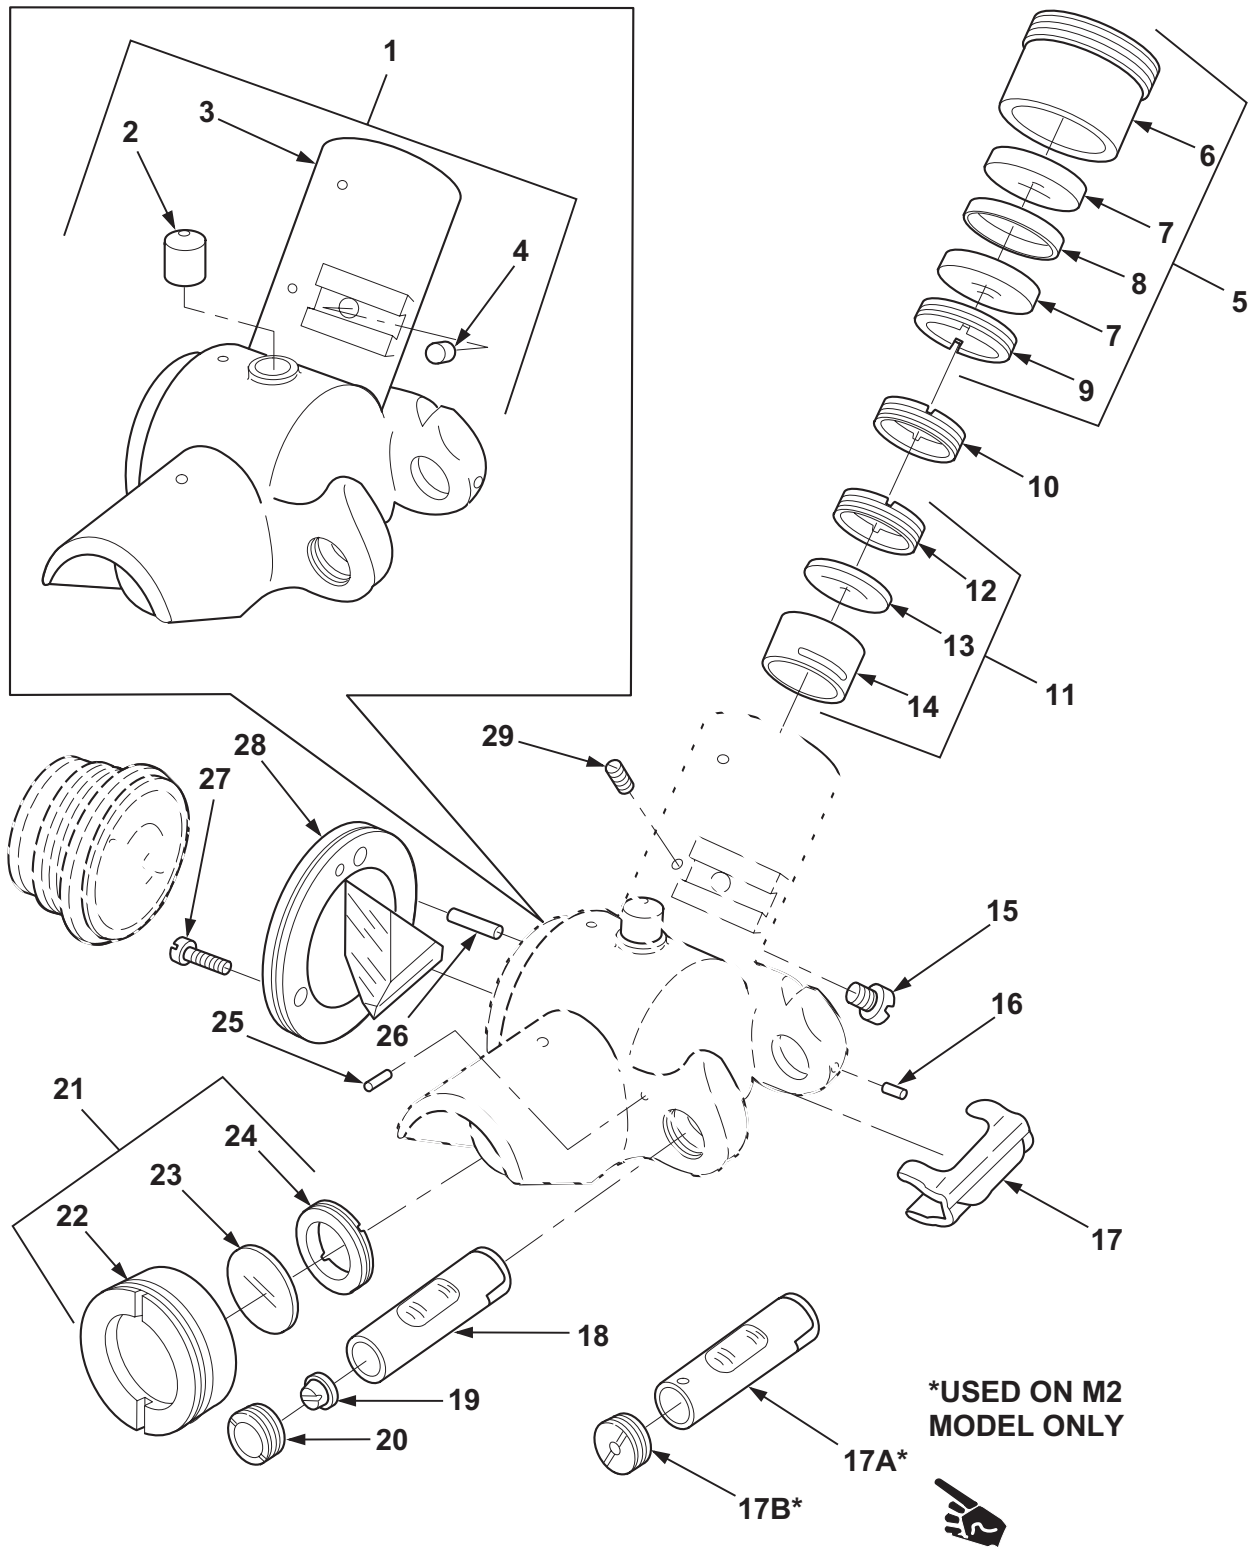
Elbow Telescope 8211640; Eyepiece Assembly, Optical 8211641; Reticle Assembly 9362776; Cell Assembly, Optical 8211643; and Telescope Subassembly 8211647.
